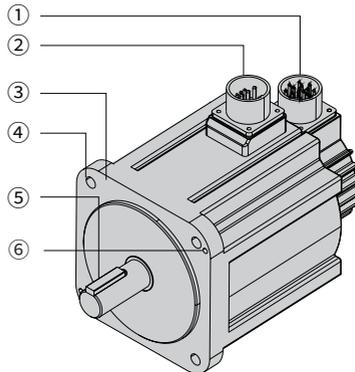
Components of connector-type motors in flange sizes 100, 130, and 180
